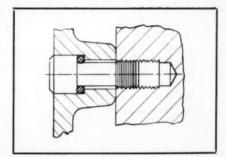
Sketch showing design of latch for use where boss on door must contact mating piece.
